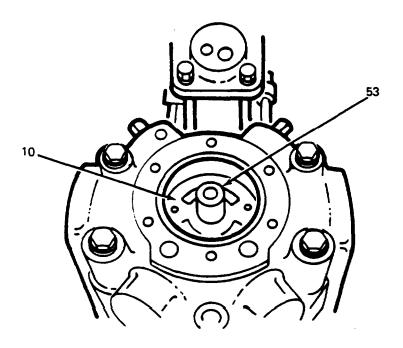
Charge Pump Eccentric, Inner and Outer Rotor.
